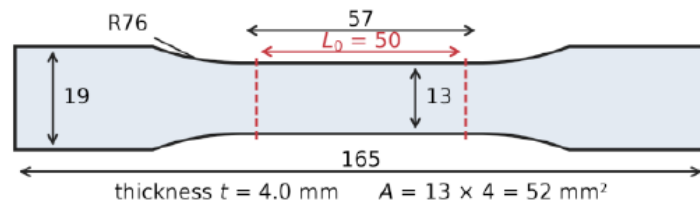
Geometry of the ASTM D638 Type I specimen used in the study; dimensions in millimeters.
